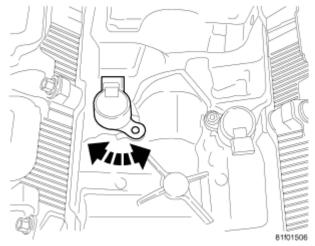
MDS Solenoid Removal Courtesy of CHRYSLER LLC
